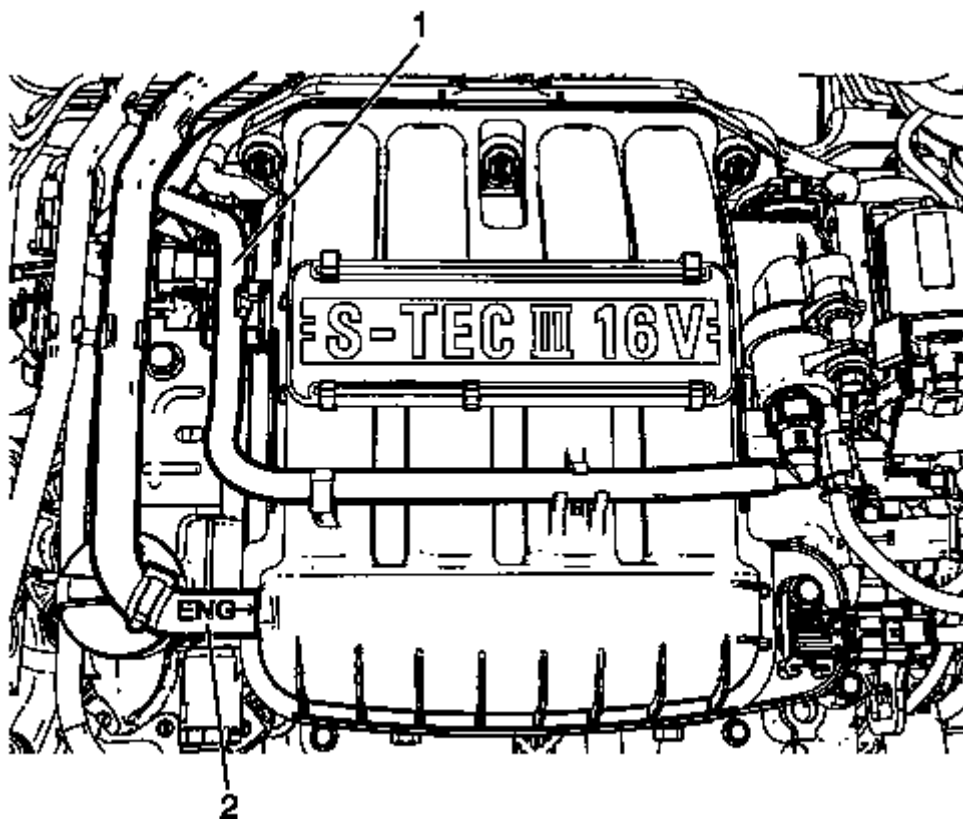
Evaporative Emission Canister Purge Solenoid Valve Hose
